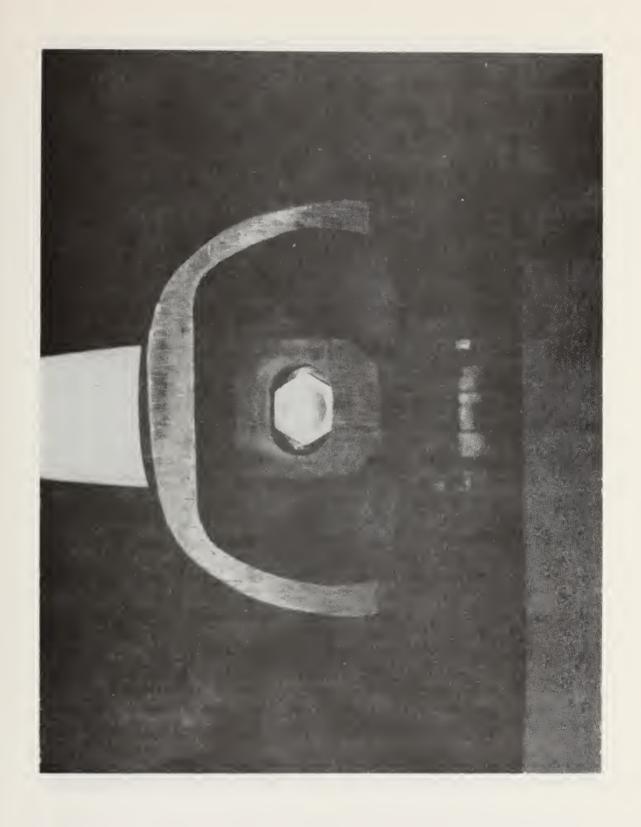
Bottom view of hook point-boss joint showing bolt head seated in the hook point.
